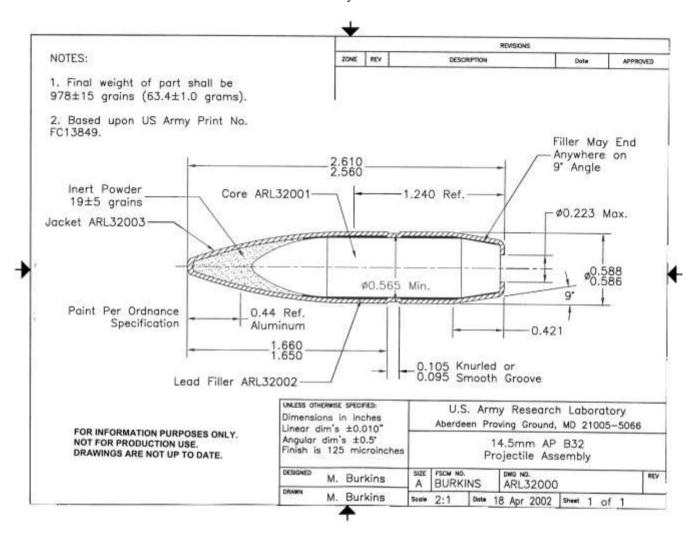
Drawing of Protection Level 4 threat (ARL Drawing 32000)
